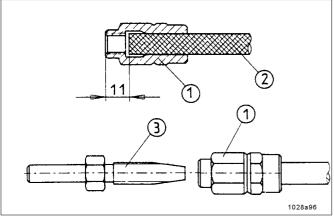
Preassembly of the threaded sleeves and hose studs on the high-pressure plstic hose
